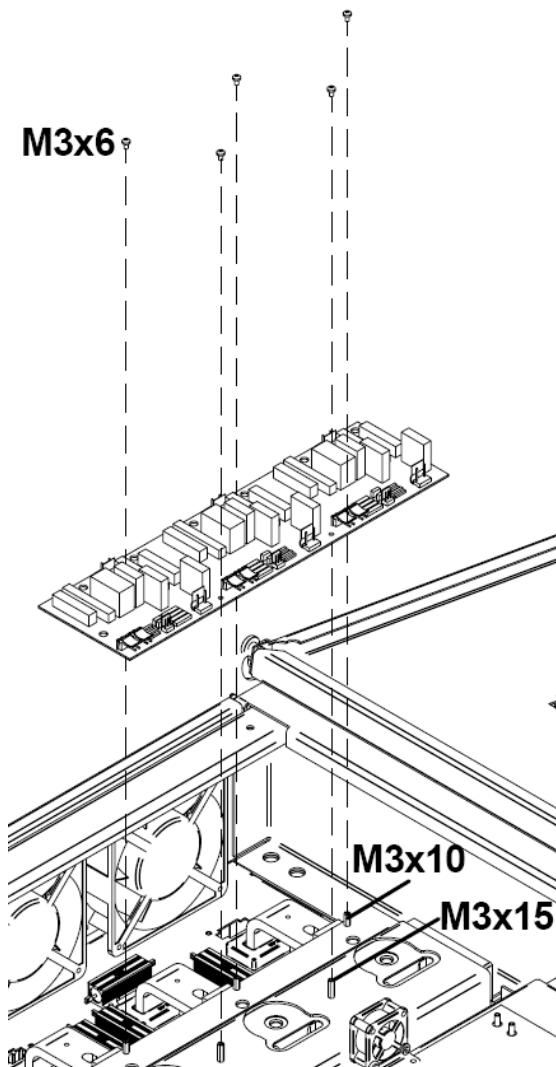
(c) Disassembly of the Snubber, Trigger and Soft Charge protection
